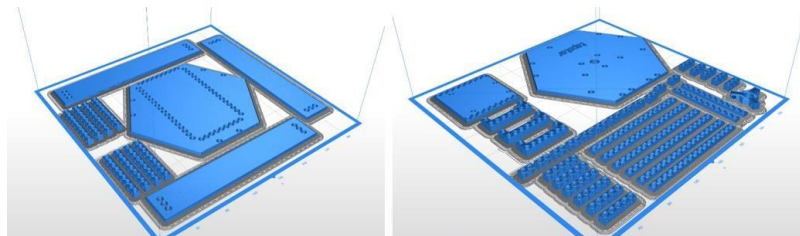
Printer 1 (see left), Printer 2 (see right)
